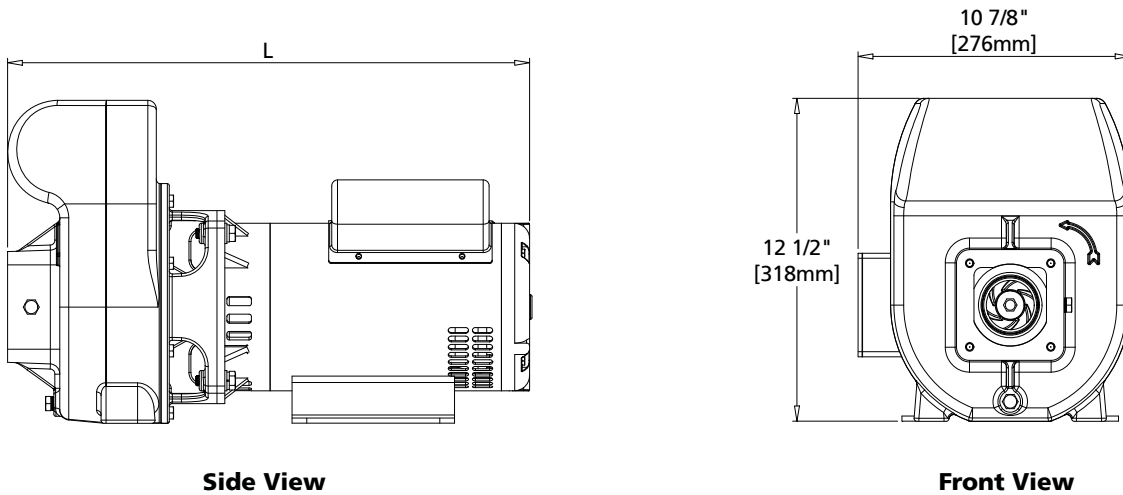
A Dimensions 5PXC2A THRU 5PXC5A
